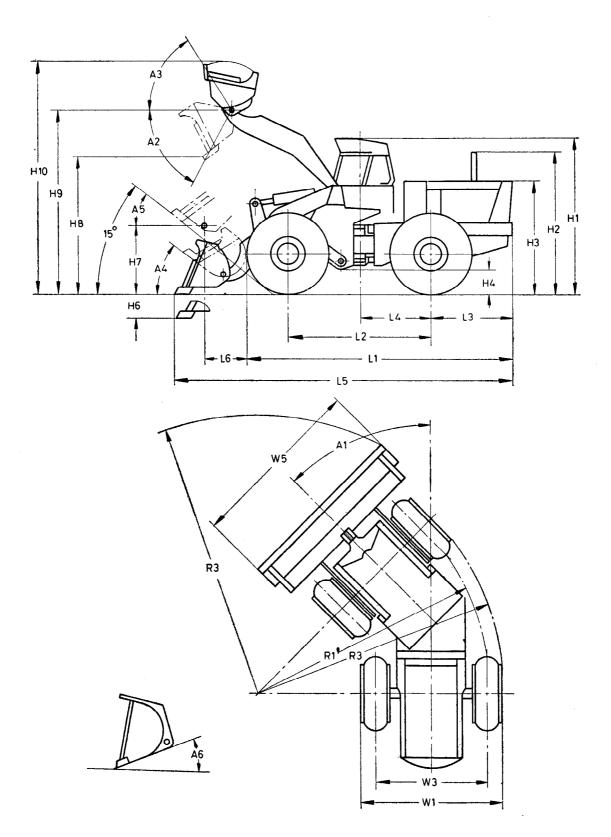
DIMENSIONS OF BASE MACHINE (WHEEL LOADER)
